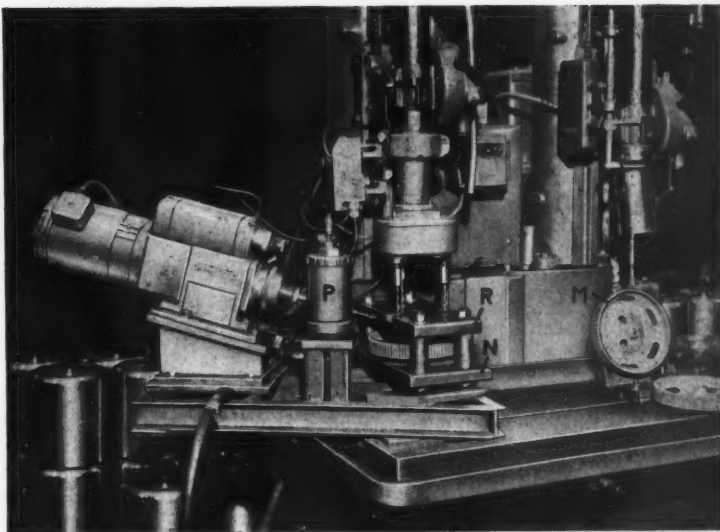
In this view, the turret has been indexed after withdrawing a bush from the bottom of the magazine seen in Fig. 6. The fixture in the foreground is used for checking the concentricity of the internal teeth in the driving gear in relation to the bushed bore
